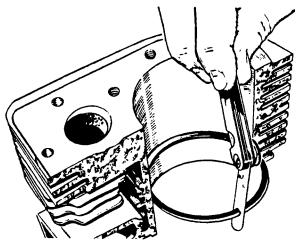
POSITIONING OF PISTON RING AND MEASURING OF END GAP
